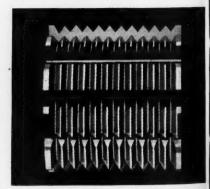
Thread Hob, Without Lead, That was Ground on Standard Thread Grinder Equipped with Standard Hob-Grinding Attachment
